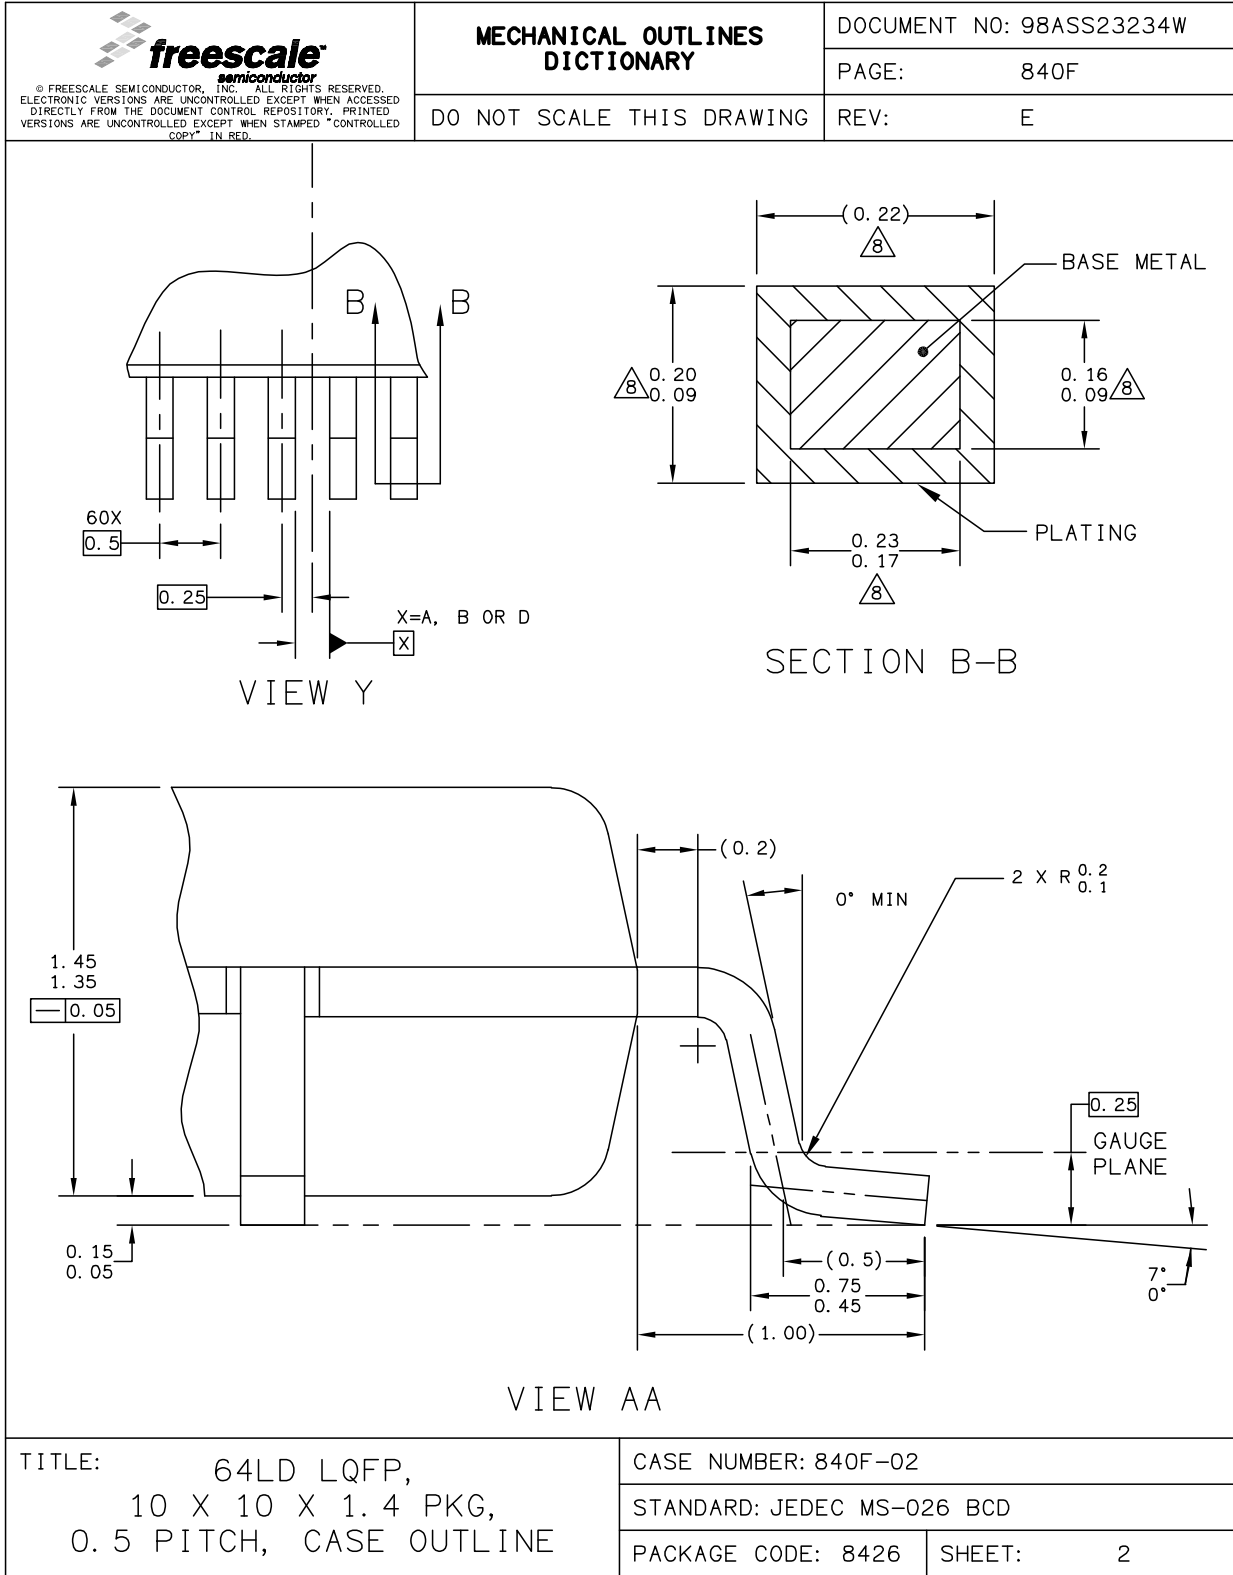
64 LQFP package mechanical drawing (2 of 3)
